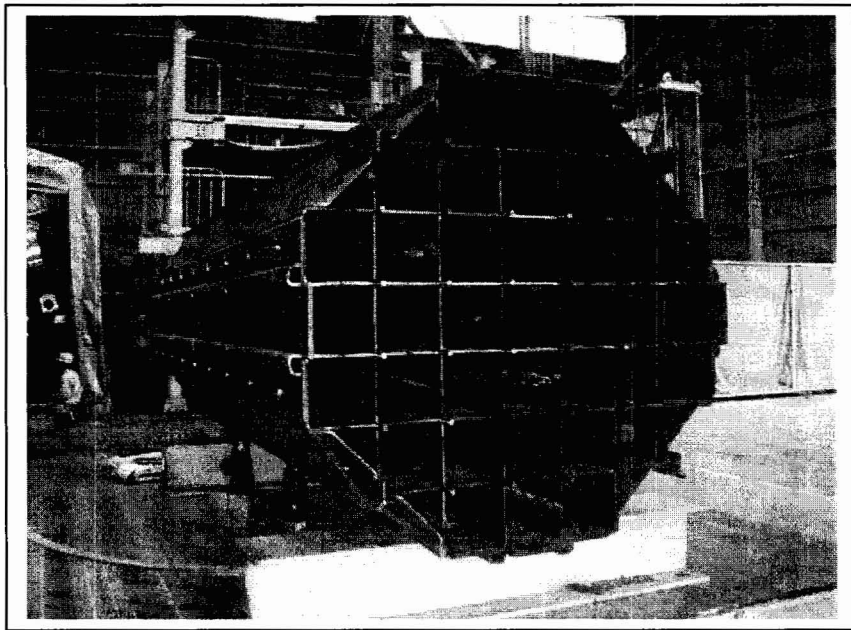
Prototype PWR 37 Fuel Assembly Basket
